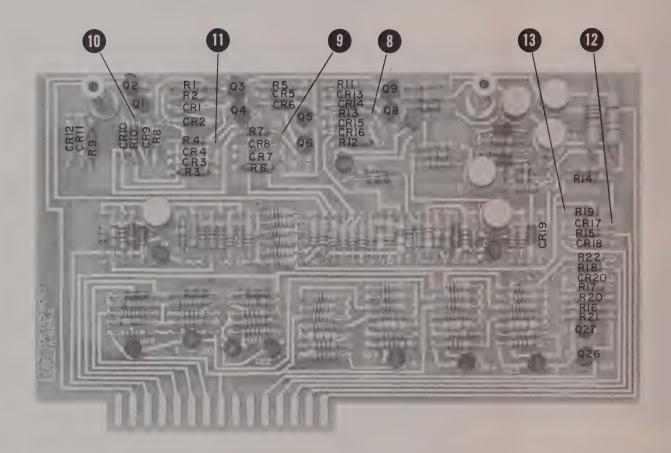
A3 Relay Driver Assembly Component Identification for S-Parameter Latches
